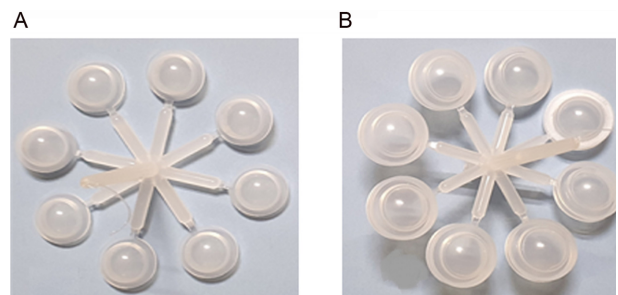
The secondary plastic molds for contact lenses processed using the primary core metal molds in Fig. 5. A. The convex-shaped core mold. B. The concave-shaped core mold
